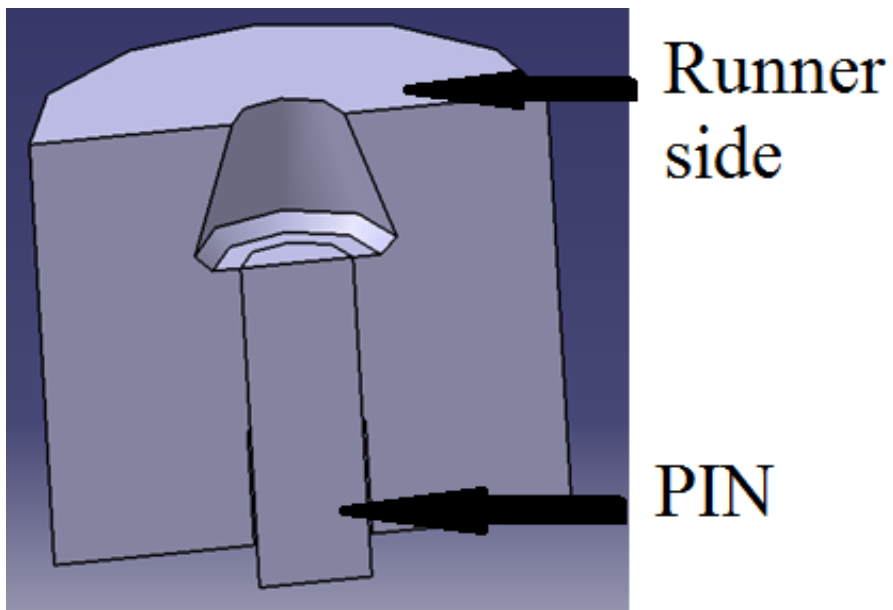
Isometric view pin ϕ 2 mould side.
